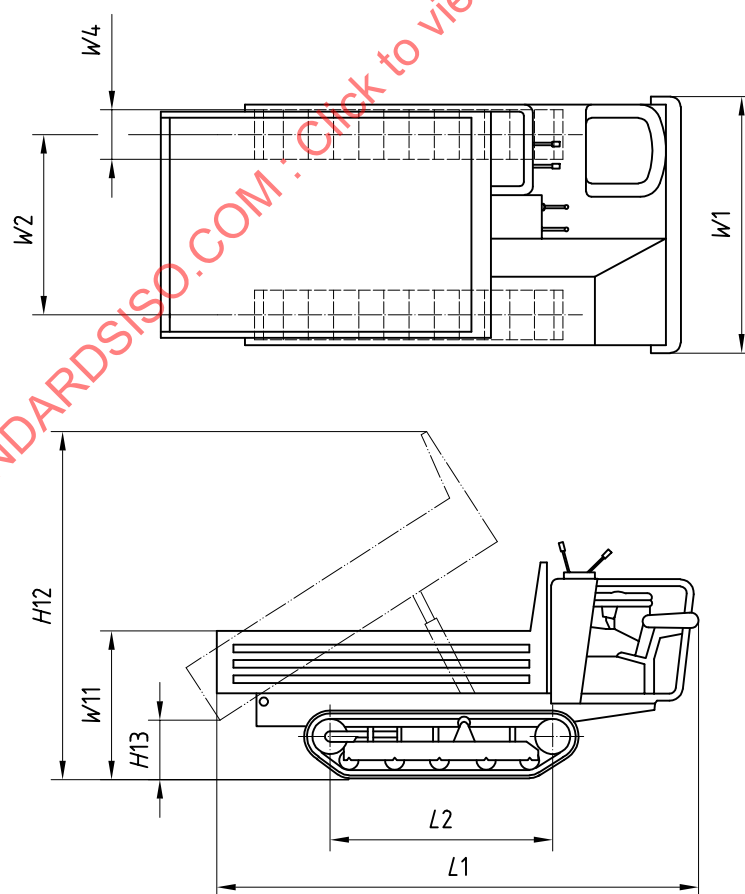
Dimensions of crawler compact dumper — Rear operator position
